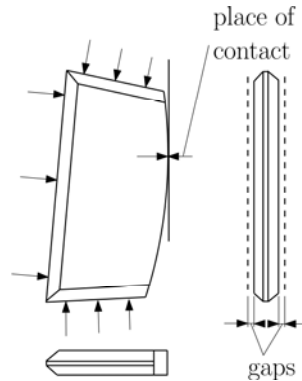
The modified fretting pad geometry with additional chamfers and lateral gaps allowing better match with the contact surface of a specimen. The rotated position enables a one-off reuse of the same pad.
